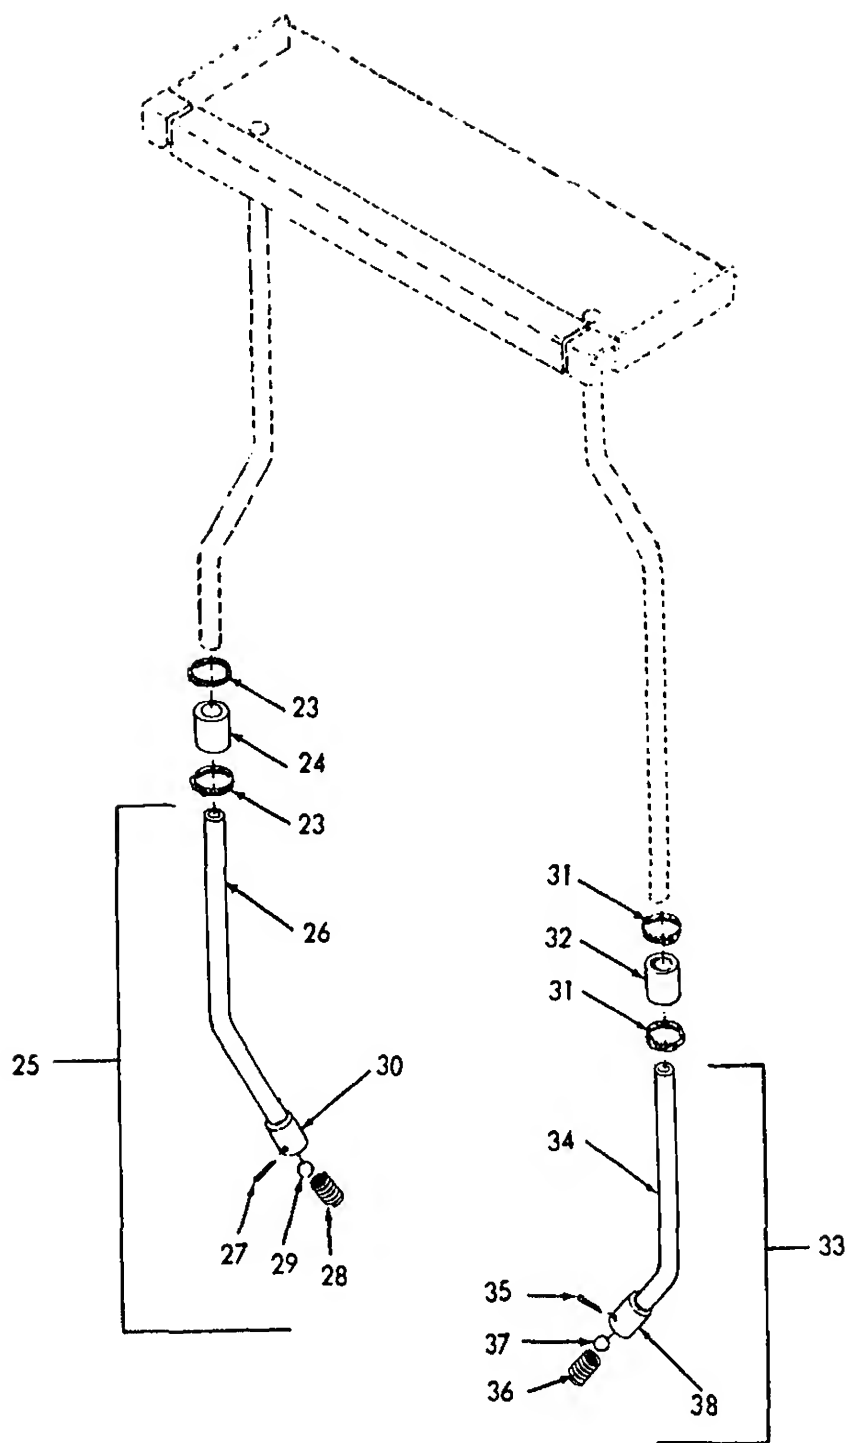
Casing, Panels, Grilles, Filter and Drain Tube
